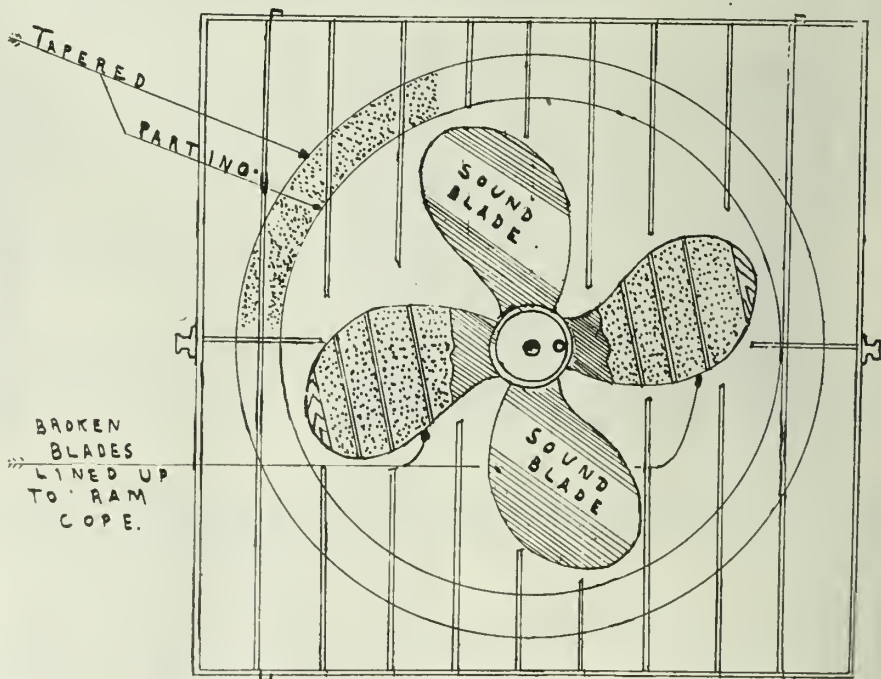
PLAN VIEW OF MOULD READY FOR RAMMING COPE
